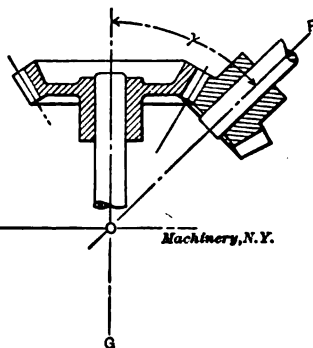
Acute Bevel Gearing Used as Substitute for Internal Gearing in Fig. 16
